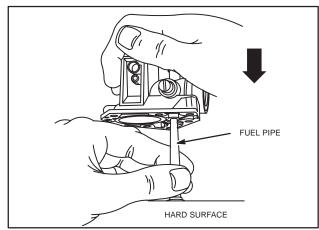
INSTALLING FUEL PIPE, MINLON ™ CARBURETOR
